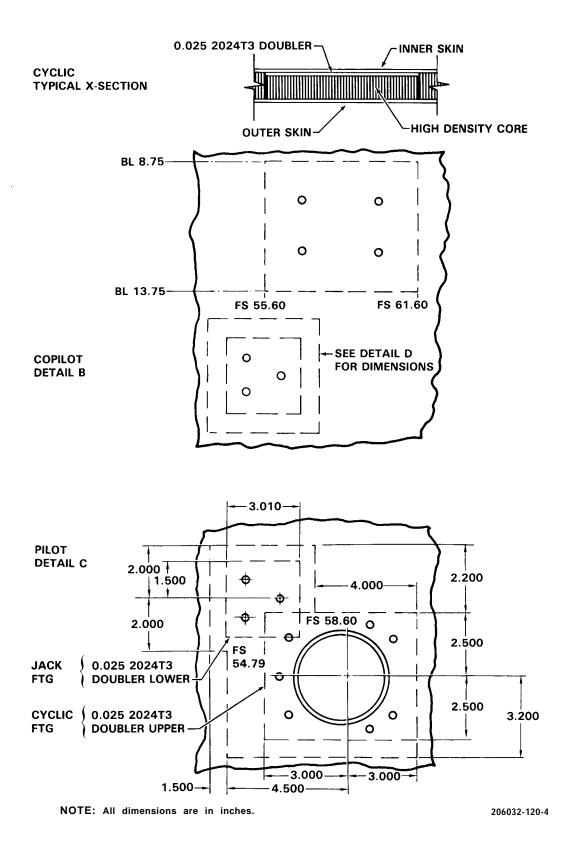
Honeycomb Panel – Forward Lower Cabin Shell Repair (Sheet 4)
